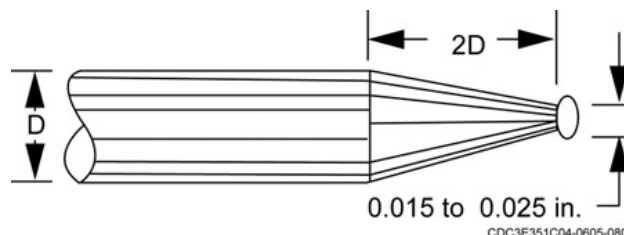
Ball tipped electrode for welding aluminum.
